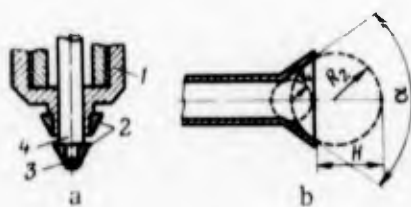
Working Portion of Device for Measurement of Internal Angle Using Indicator or Micrometer Screw (a) and Two Balls (b): 1, cap; 2, interchangeable conical washers; 3, nut; 4, pusher
